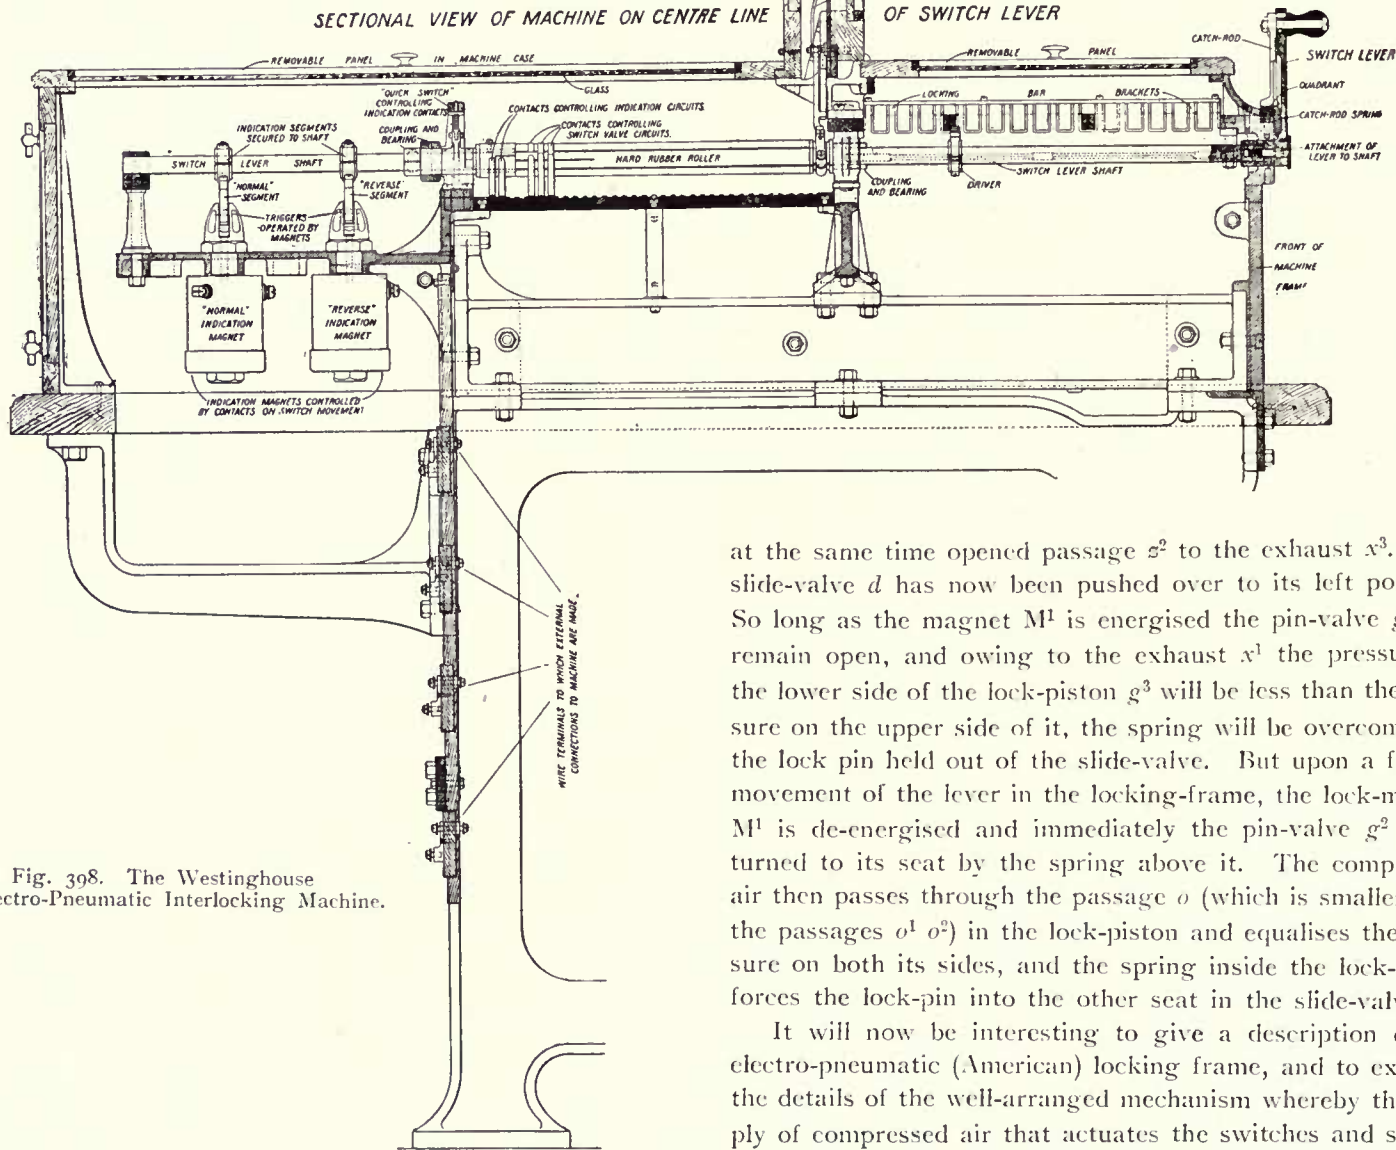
The Westinghouse Electro-Pneumatic Interlocking Machine.
